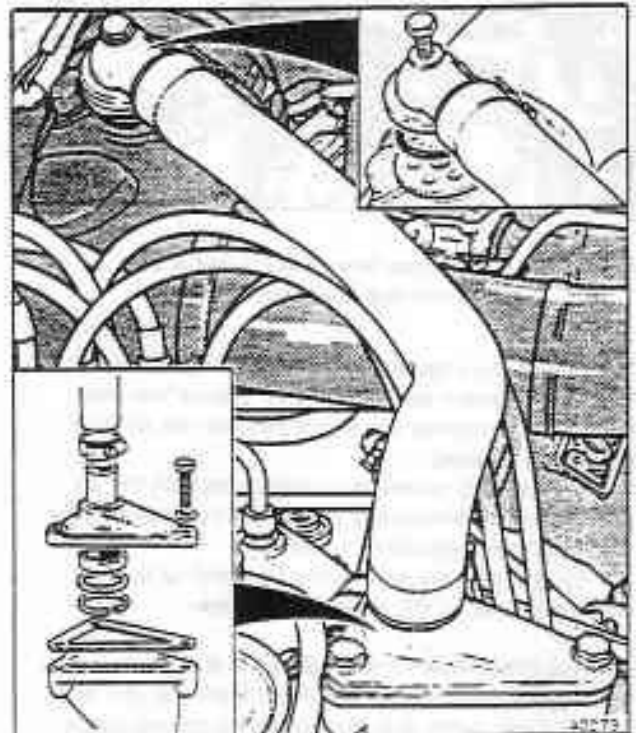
Crankcase breather (SU HIF7 carburettors)
